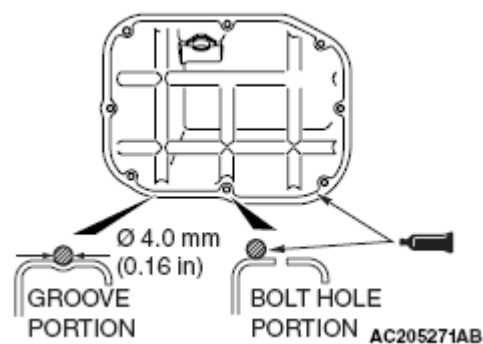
Applying Bead Of Sealant To Mating Surface Of Engine Lower Oil Pan
